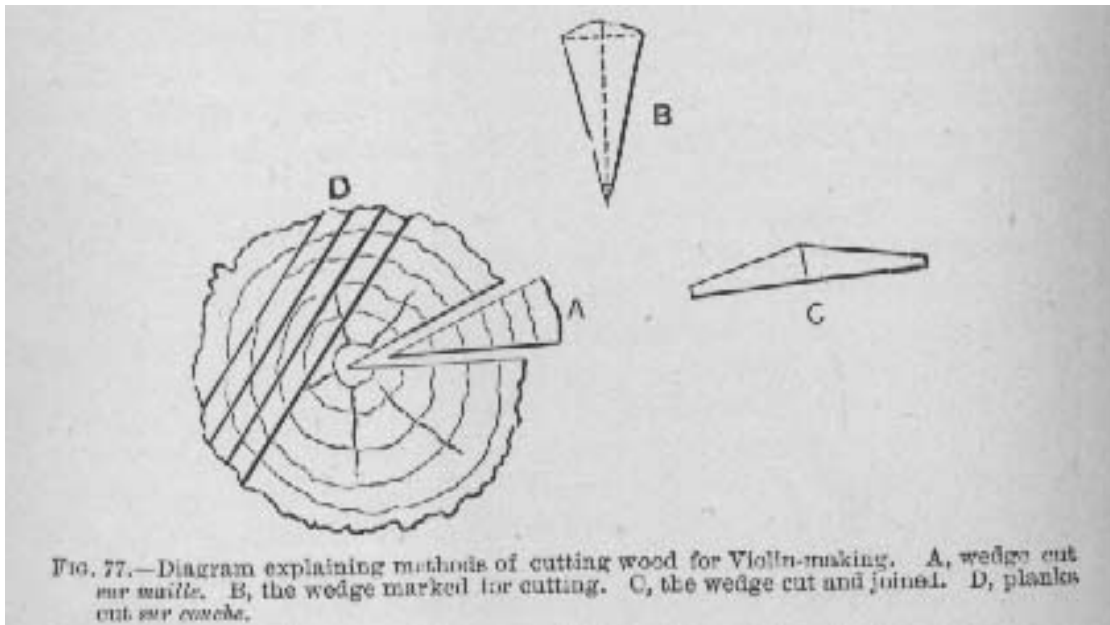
Diagram explaining methods of cutting wood for Violin-making. A, wedge cut sur maille. B, the wedge marked for cutting. C, the wedge cut and joined. D, planks cut sur coupe.
